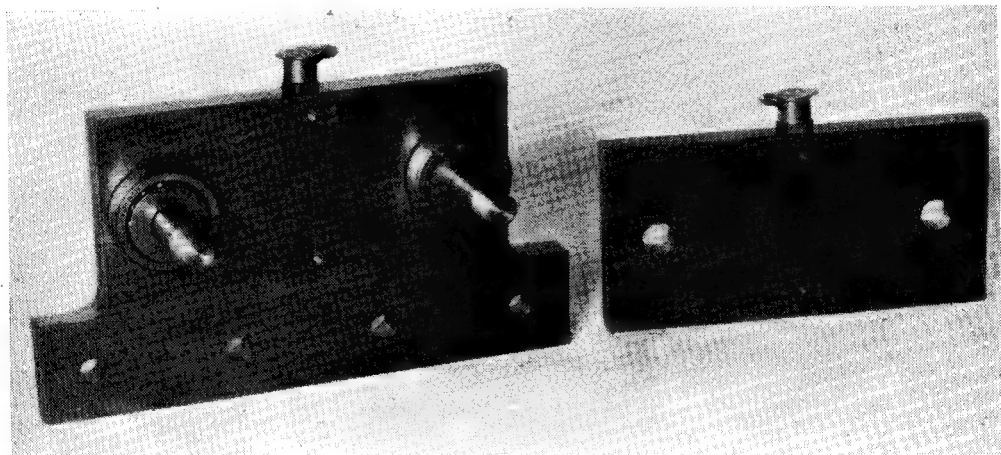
A. The parts of the carriage, showing the bearings in position and the lubrication system
